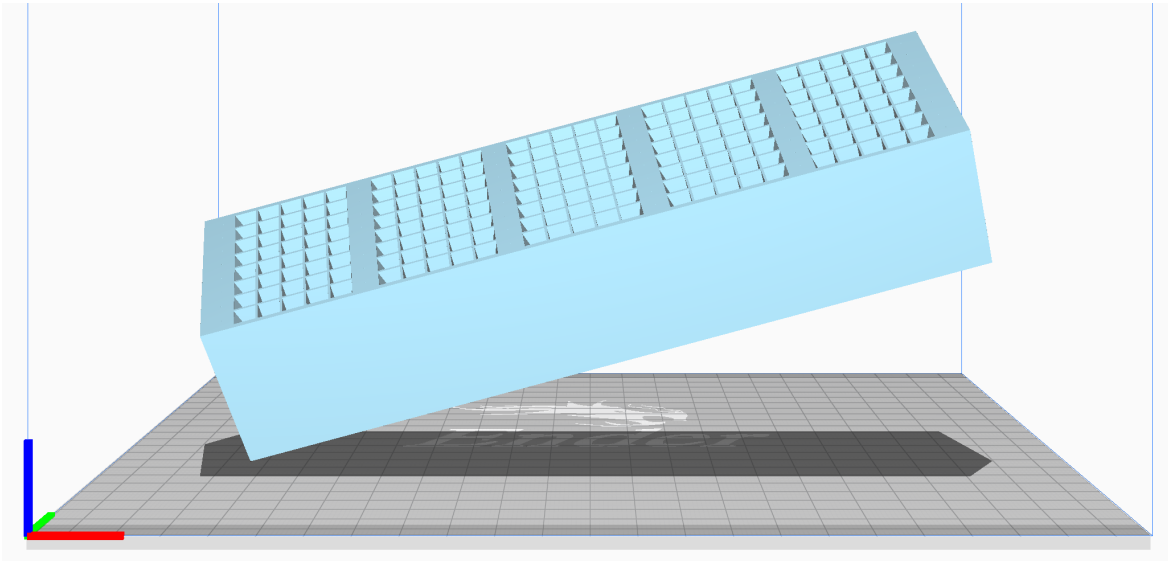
Example of the angle used in T-Liner prints using FDM
